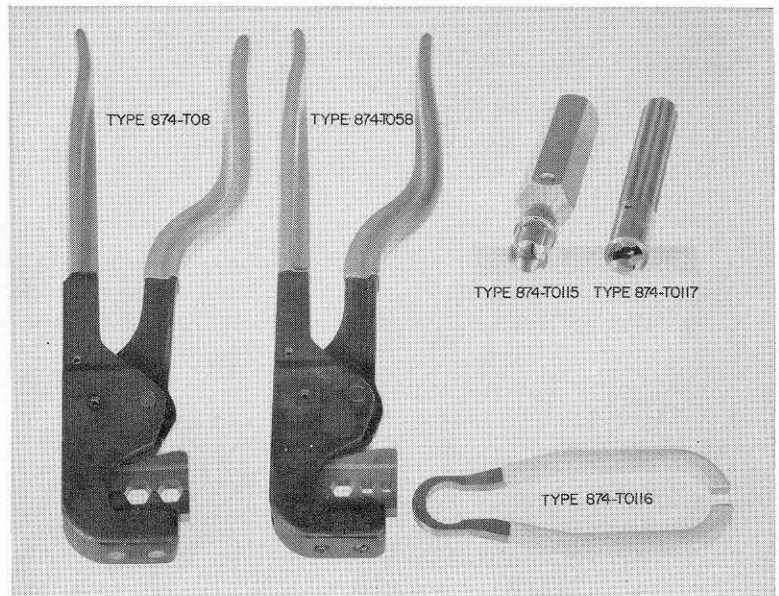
View of the assembly tools for assembly of Type 874 Coaxial Connectors. The three tools at the right, Types 874-T015, 116, and 117, comprise the Type 874-TOK Tool Kit. The crimping tools are shown at the left.
